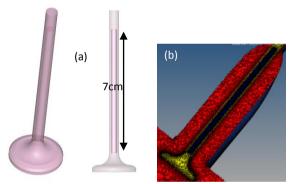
(a) ProE design views; (b) Meshing of through stem one straight hole valve
